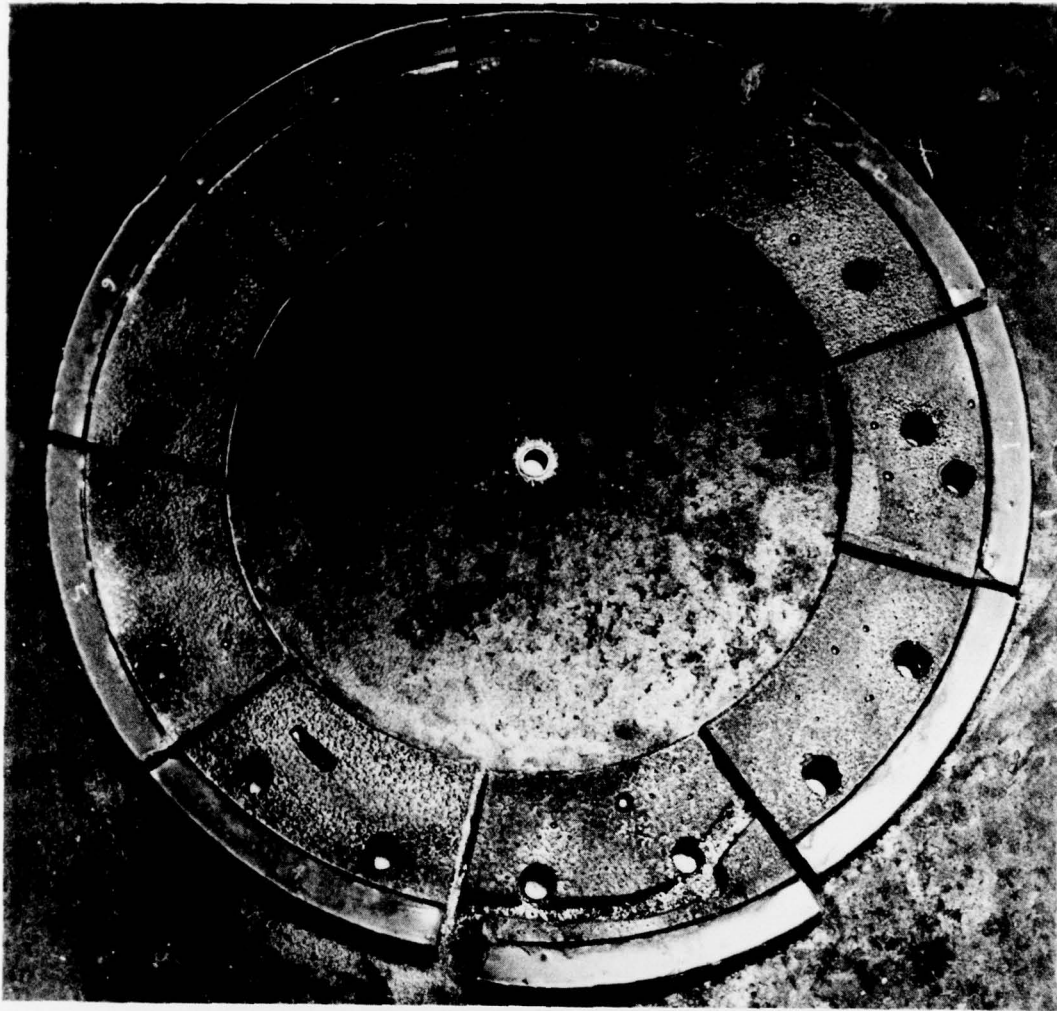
Top surface of the chock pads of Test Structure No. 1 following shock and vibration testing. Note the broken Pad No. 3.
